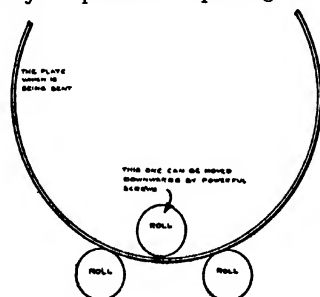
This shows how three rolls bend the boiler plates to a circular form.
